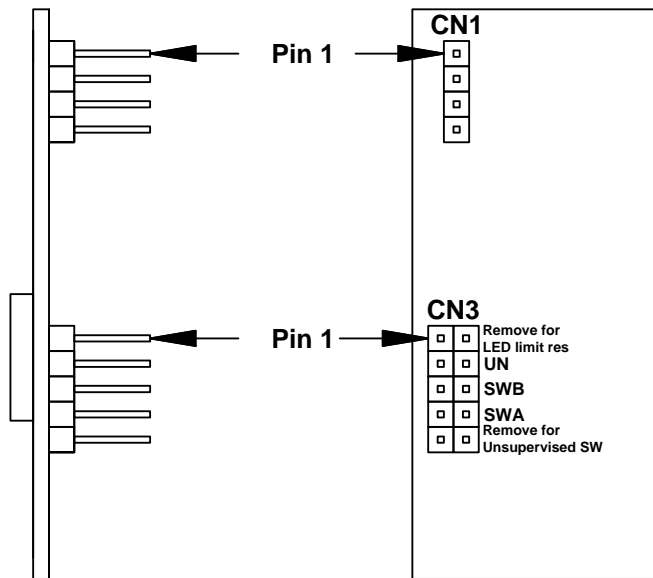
Printed Circuit Board Showing Locations of CN1 and CN3
